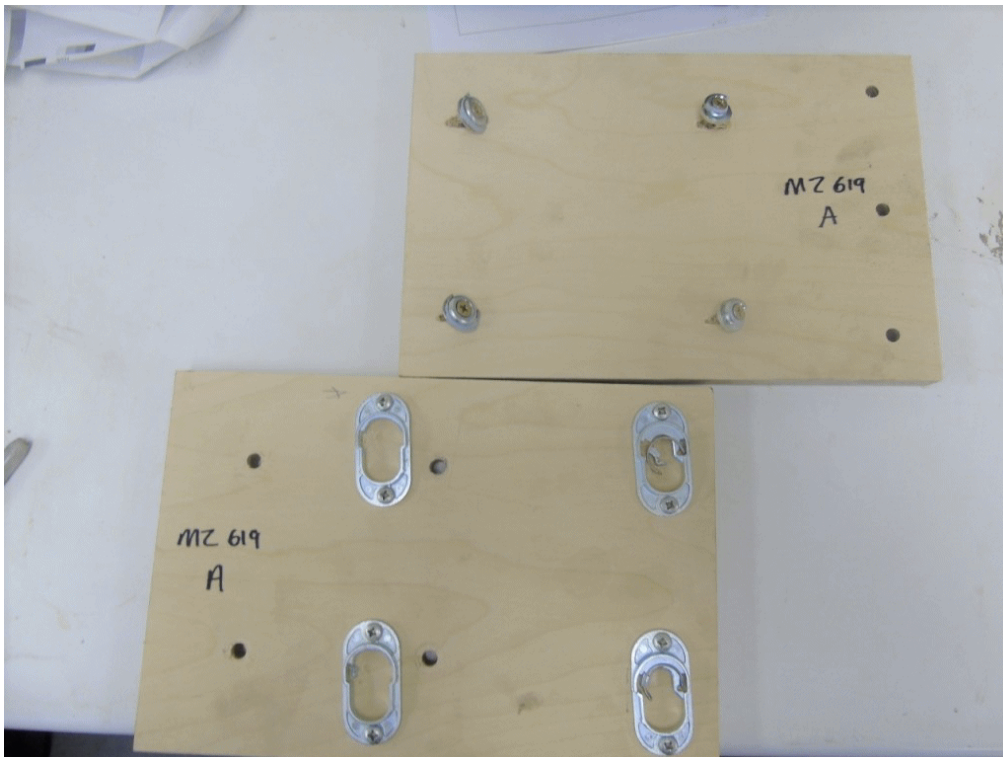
A view showing the general condition of the fixing after a pull apart test on a type 1 - metal fixing.
